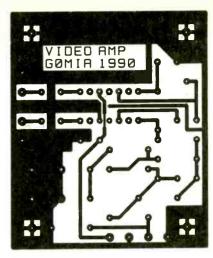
(right): PCB layout seen from the copper track side. Scale 1:1.
